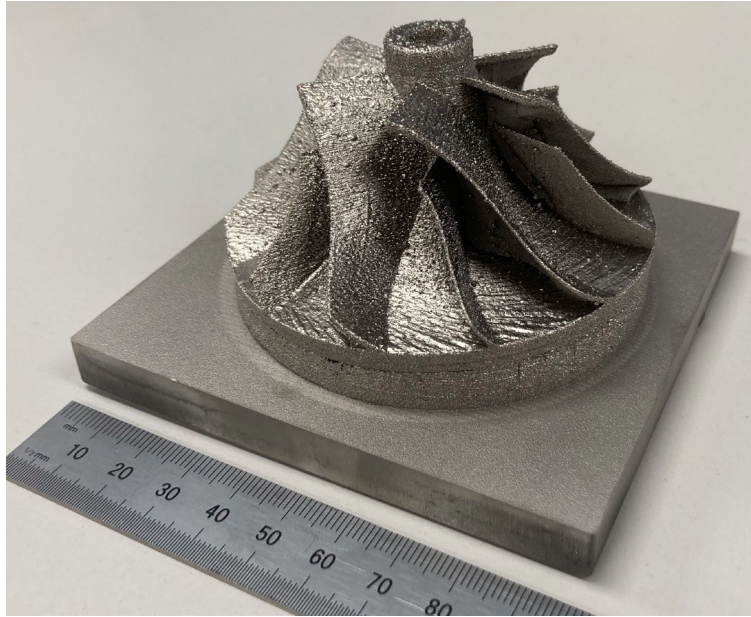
Turbo compressor impeller fabricated in Nickel 1
